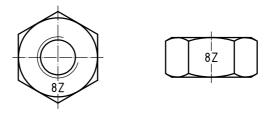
Example of marking of hot dip galvanized nuts tapped oversize to tolerance position 6AZ after coating
